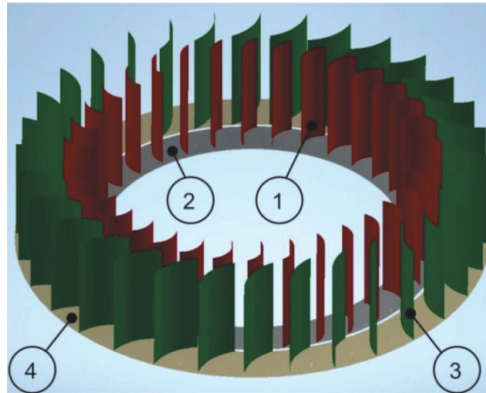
Construction of one stage of the turbine: 1 – turbine blades, 2 – the inner ring of the turbine blades, 3 – air guide vanes, 4 – the outer ring forming the set of blades (Ptak, Kołodziejczyk 2021)
